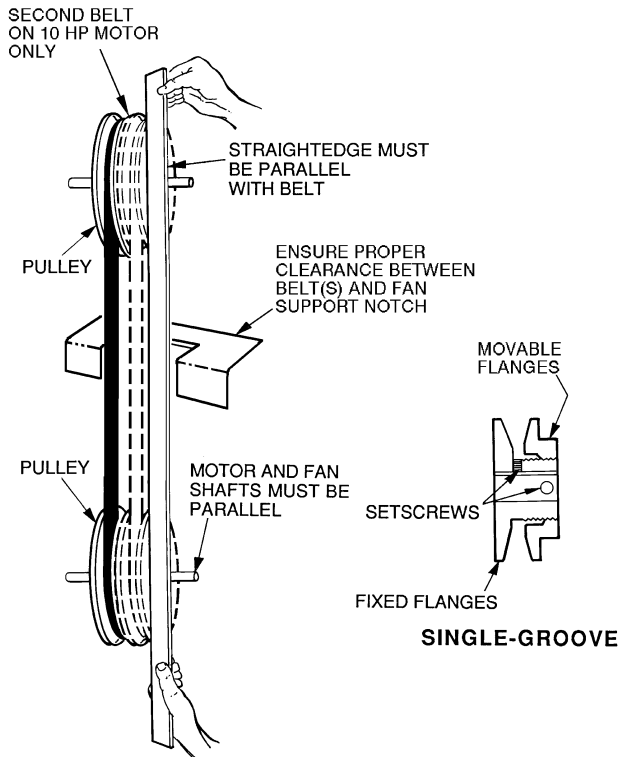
Evaporator-Fan Alignment and Adjustment
